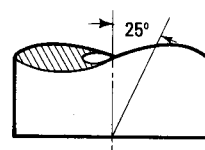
Dimensions of a helical milling cutter (in inches)
